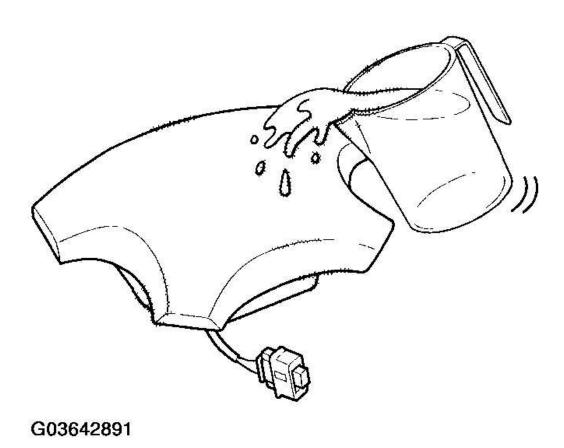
Preventing Damage To Airbag Courtesy of AMERICAN HONDA MOTOR CO., INC.
